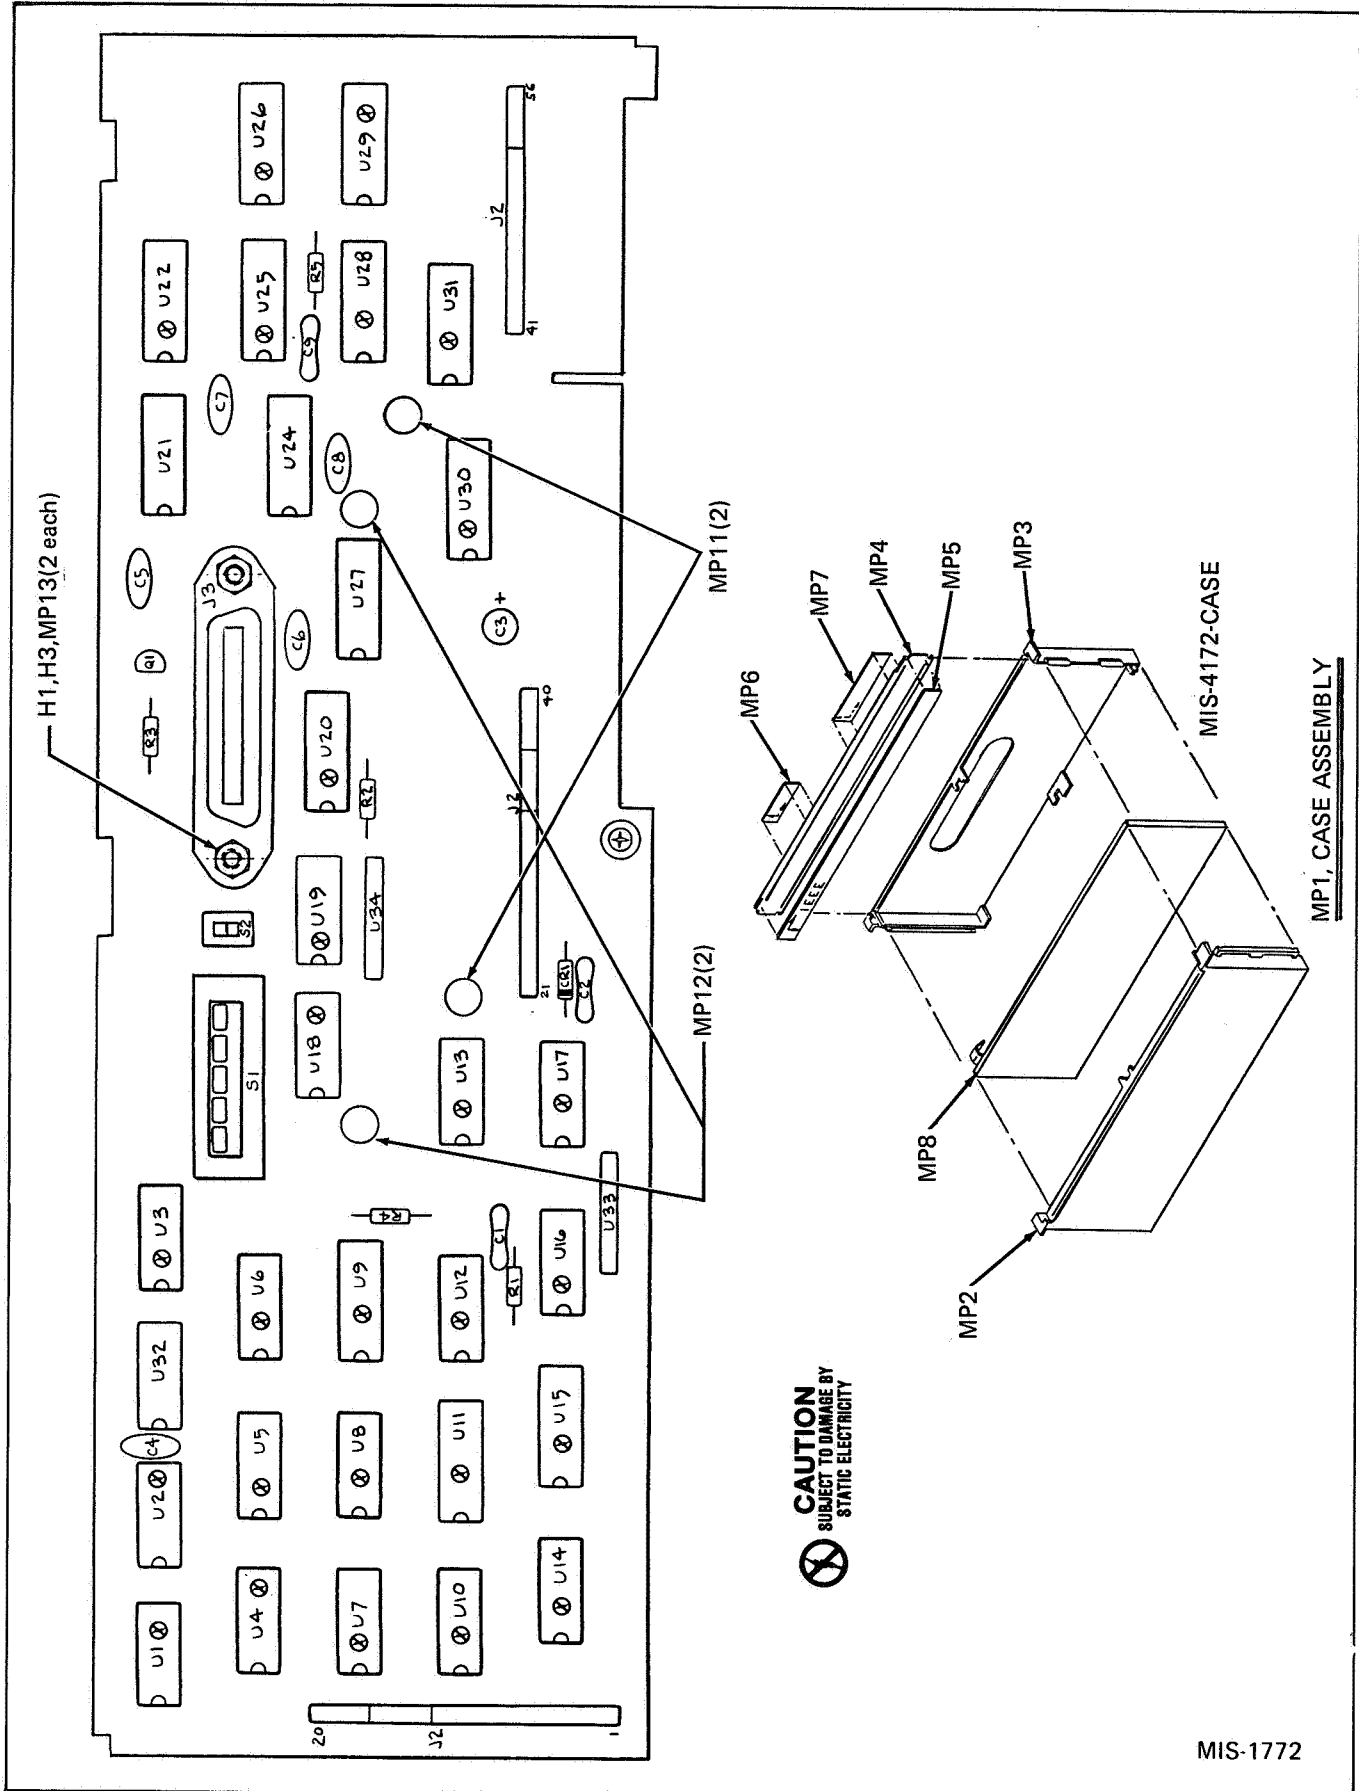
IEEE 488-1975 Interface PCB Assembly
